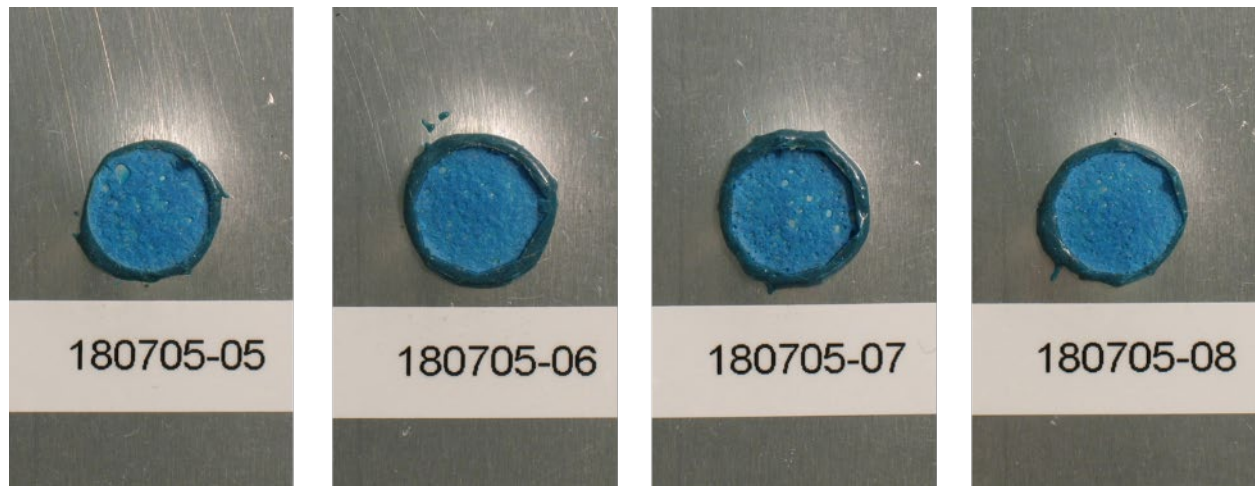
Failure surfaces of IPA-cleaned aluminum/Betamate PATTI specimens.
